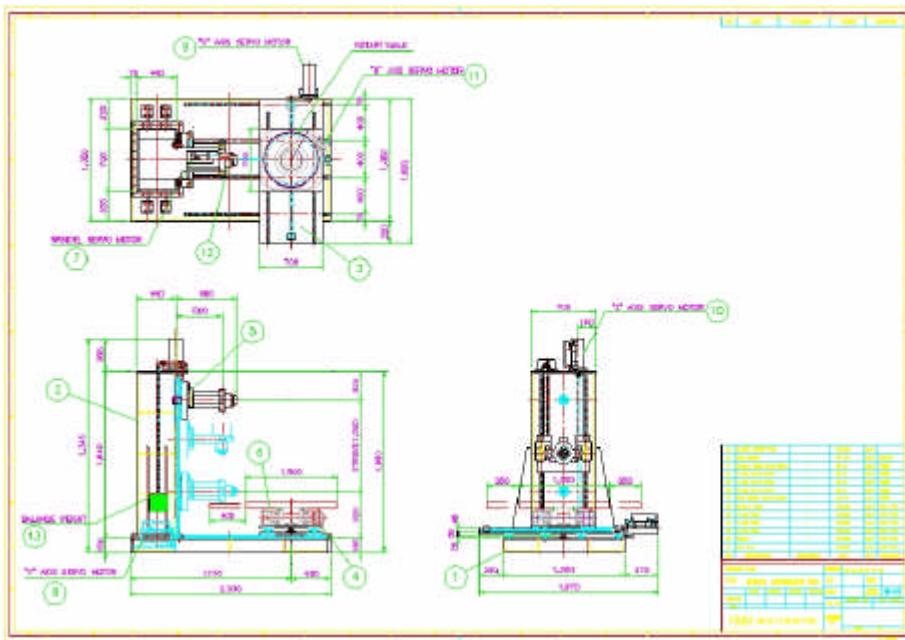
A Design Drawing of Underwater Cutting Equipment
